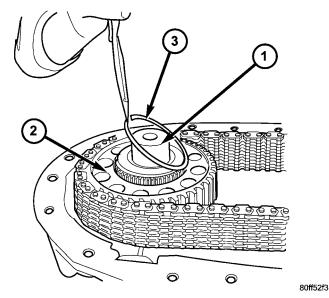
Remove Front Output Shaft Sprocket Retaining Ring
